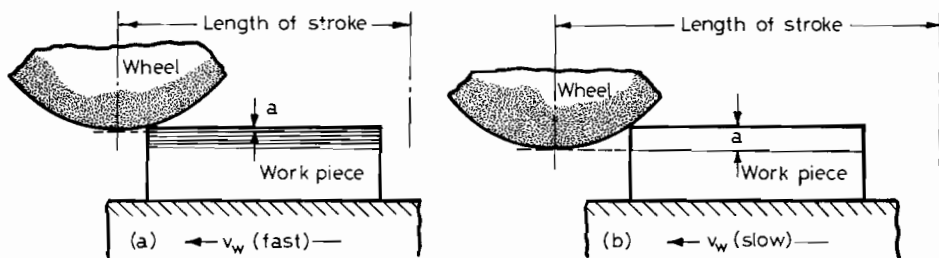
Principle of (a) conventional and (b) creep-feed surface grinding
